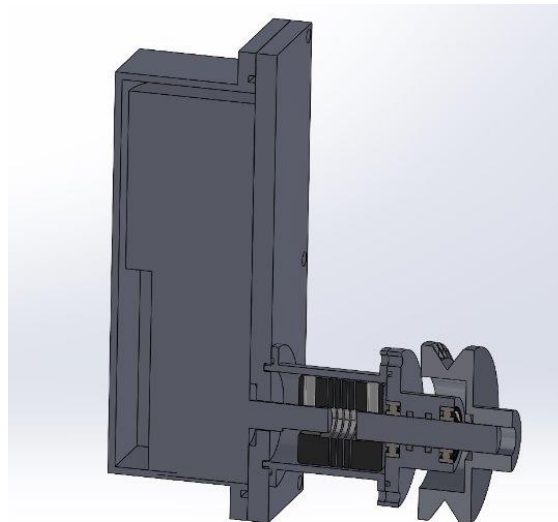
3rd iteration- This removed an unnecessary bearing and seal. This design was also investigating using a hollowed-out wheel to further reduce the profile which may not be necessary.
